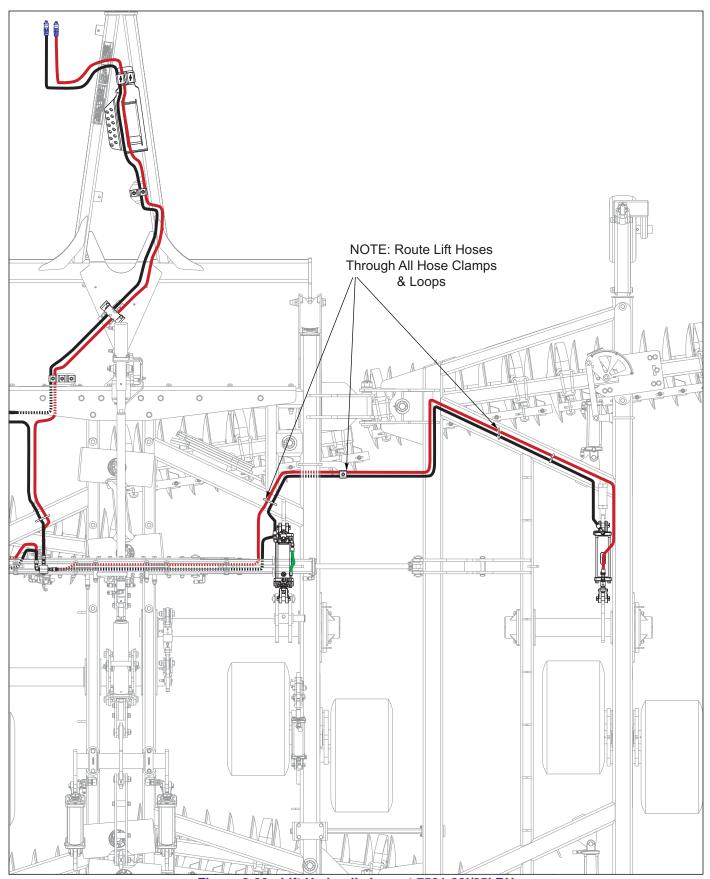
Lift Hydraulic Layout 7531-32'/35' RH
